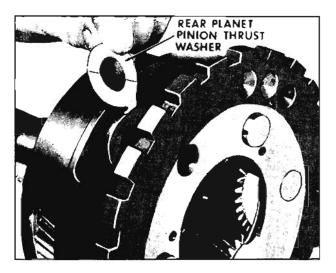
Installing Rear Planet Pinion Thrust Washer
